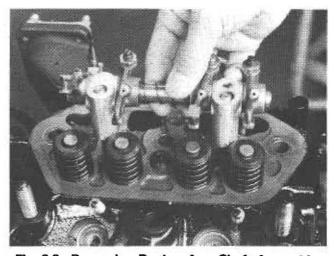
Removing Rocker Arm Shaft Assembly
